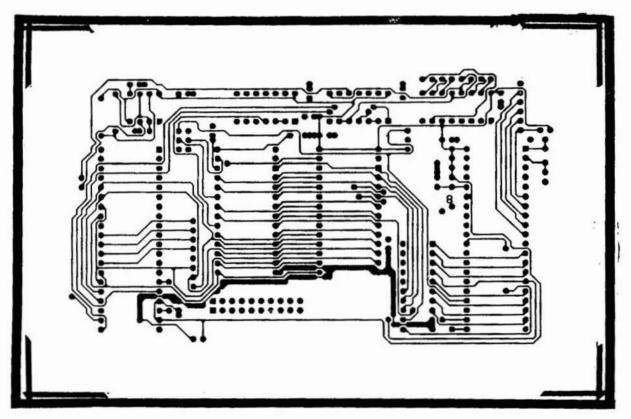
(a) Layout of PCB for Remote data acquisition and storage system (Solder side)
